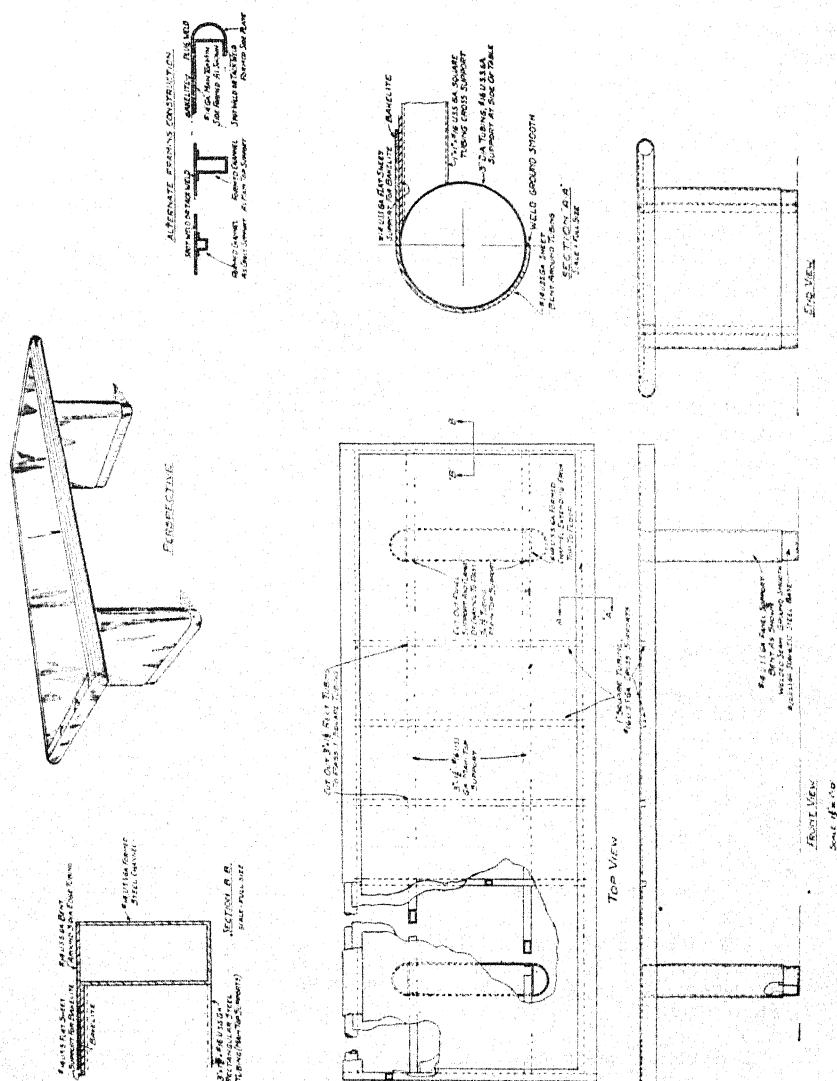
Modern all-purpose arc welded steel table.
